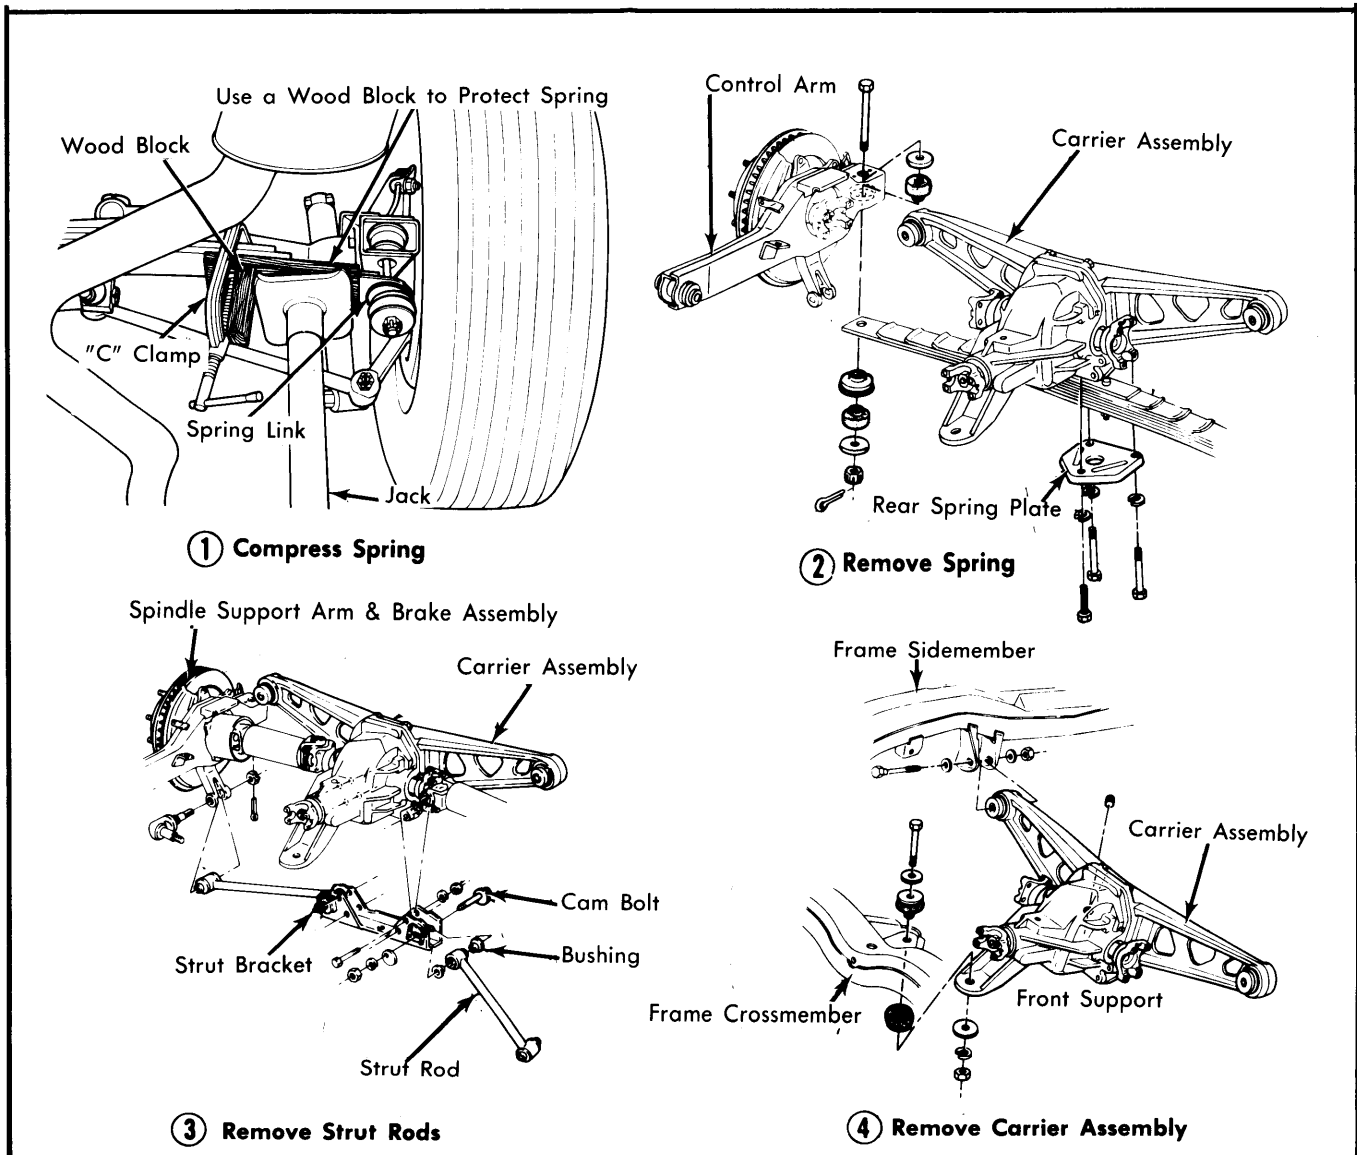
Rear Axle Removal Procedure. Spring and Strut Bracket Must Be Removed Before Removing Rear Axle.
